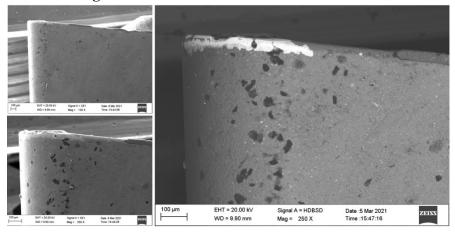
SEM Analysis of HC Coated tool (S=300 rpm,
